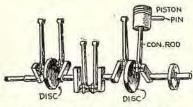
A built-up type of crank shaft (seldom used). The above is a six-cylinder crank, with four bearings. Note that it is built-up to disks.
